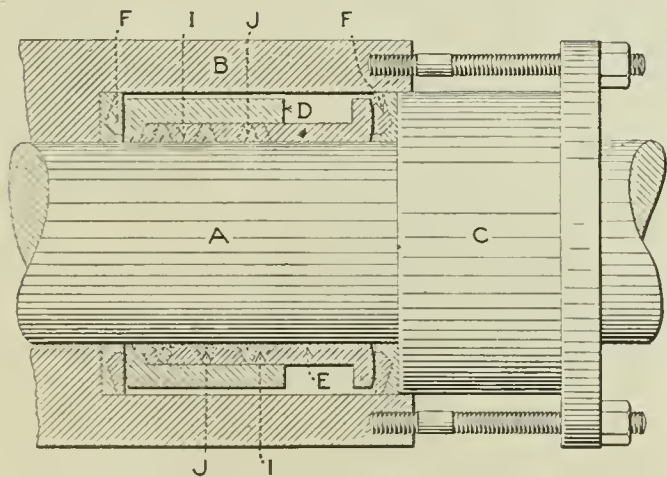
SECTIONAL VIEW OF PACKING CONTAINER
